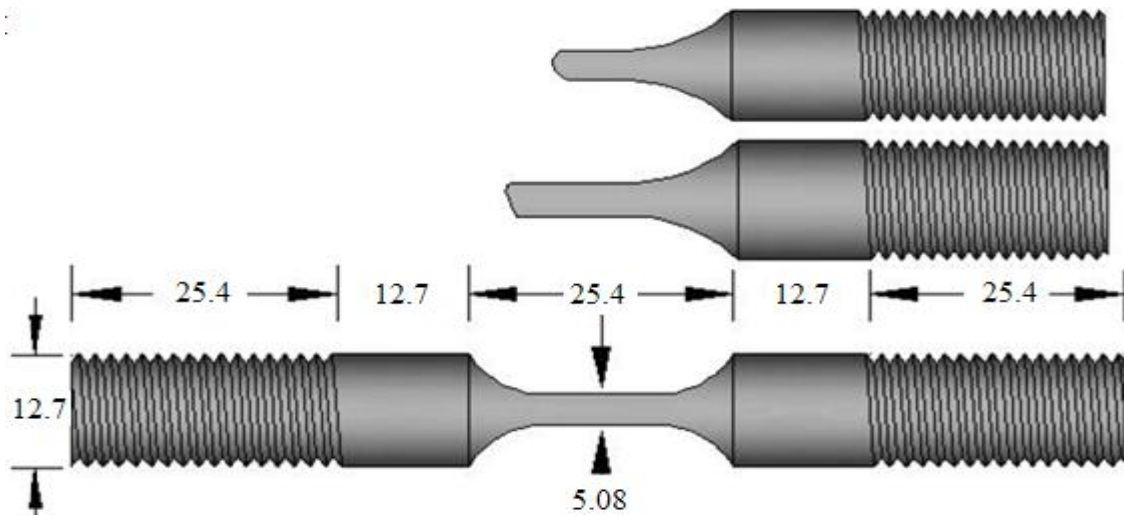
Dimensions of tensile test specimen before and after fracture [mm]
